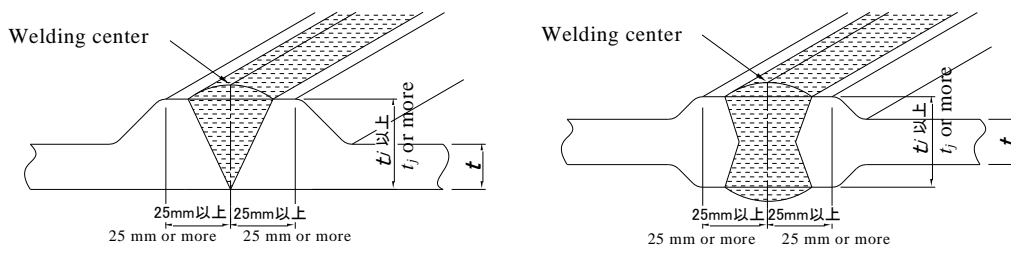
Thickened Range in Full Penetration Groove Welded Joints
